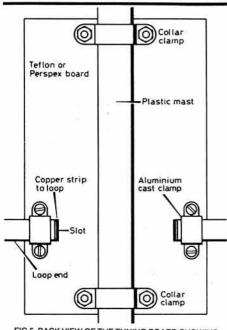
BACK VIEW OF THE TUNING BOARD SHOWING MOUNTINGS
